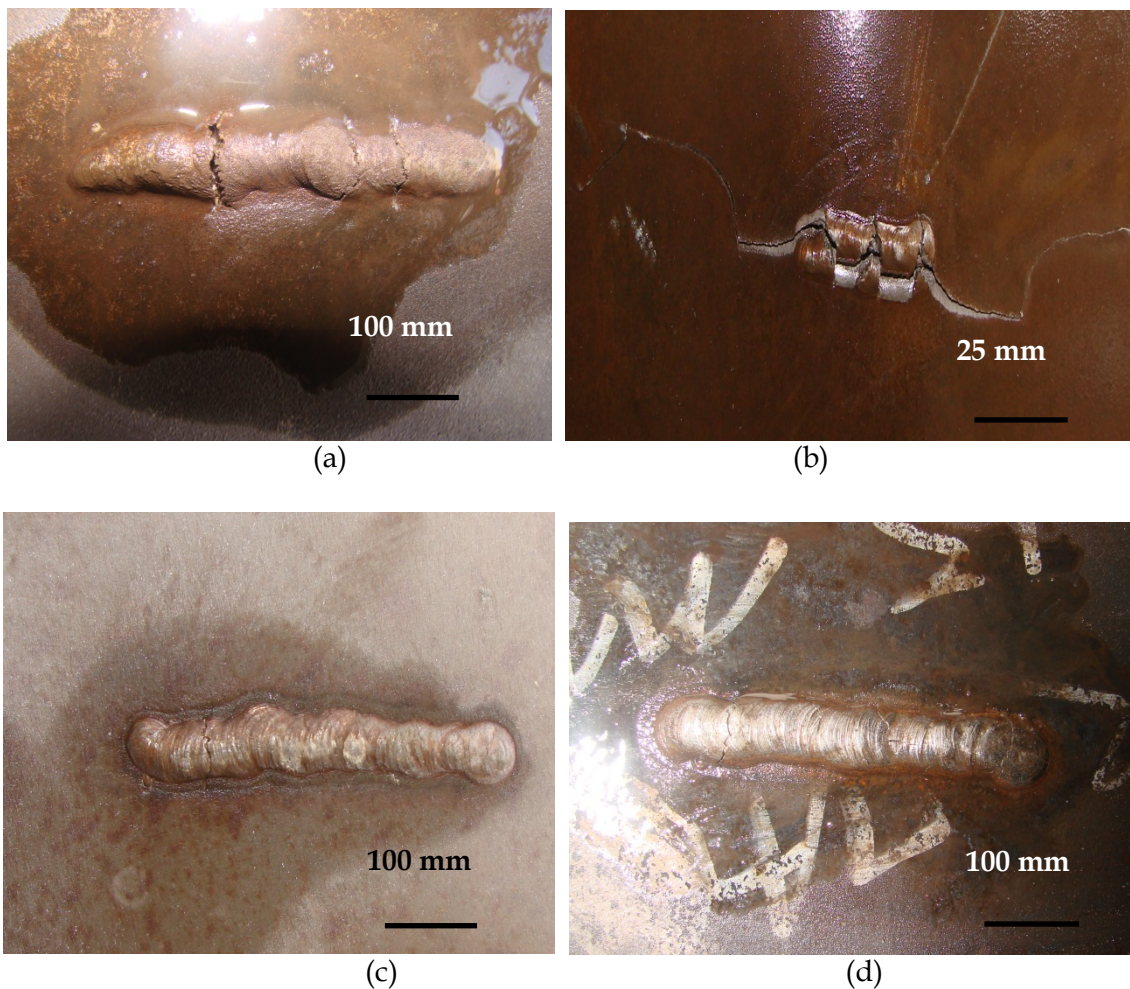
Surface appearance of the four plates (a) steel B, (b) steel H, (c) steel A and (d) steel M, after the 6th blast, clearly showing the brittle 'crack starter' weld bead and any cracking that had occurred. Only Steel H showed crack growth and this cracking was fully ductile.
